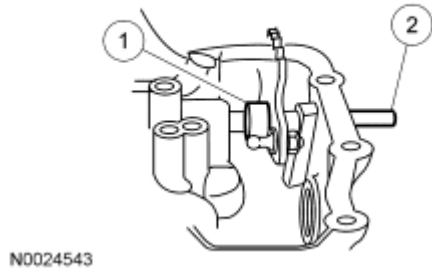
Manual Valve Detent Lever & Manual Valve Detent Lever Shaft
